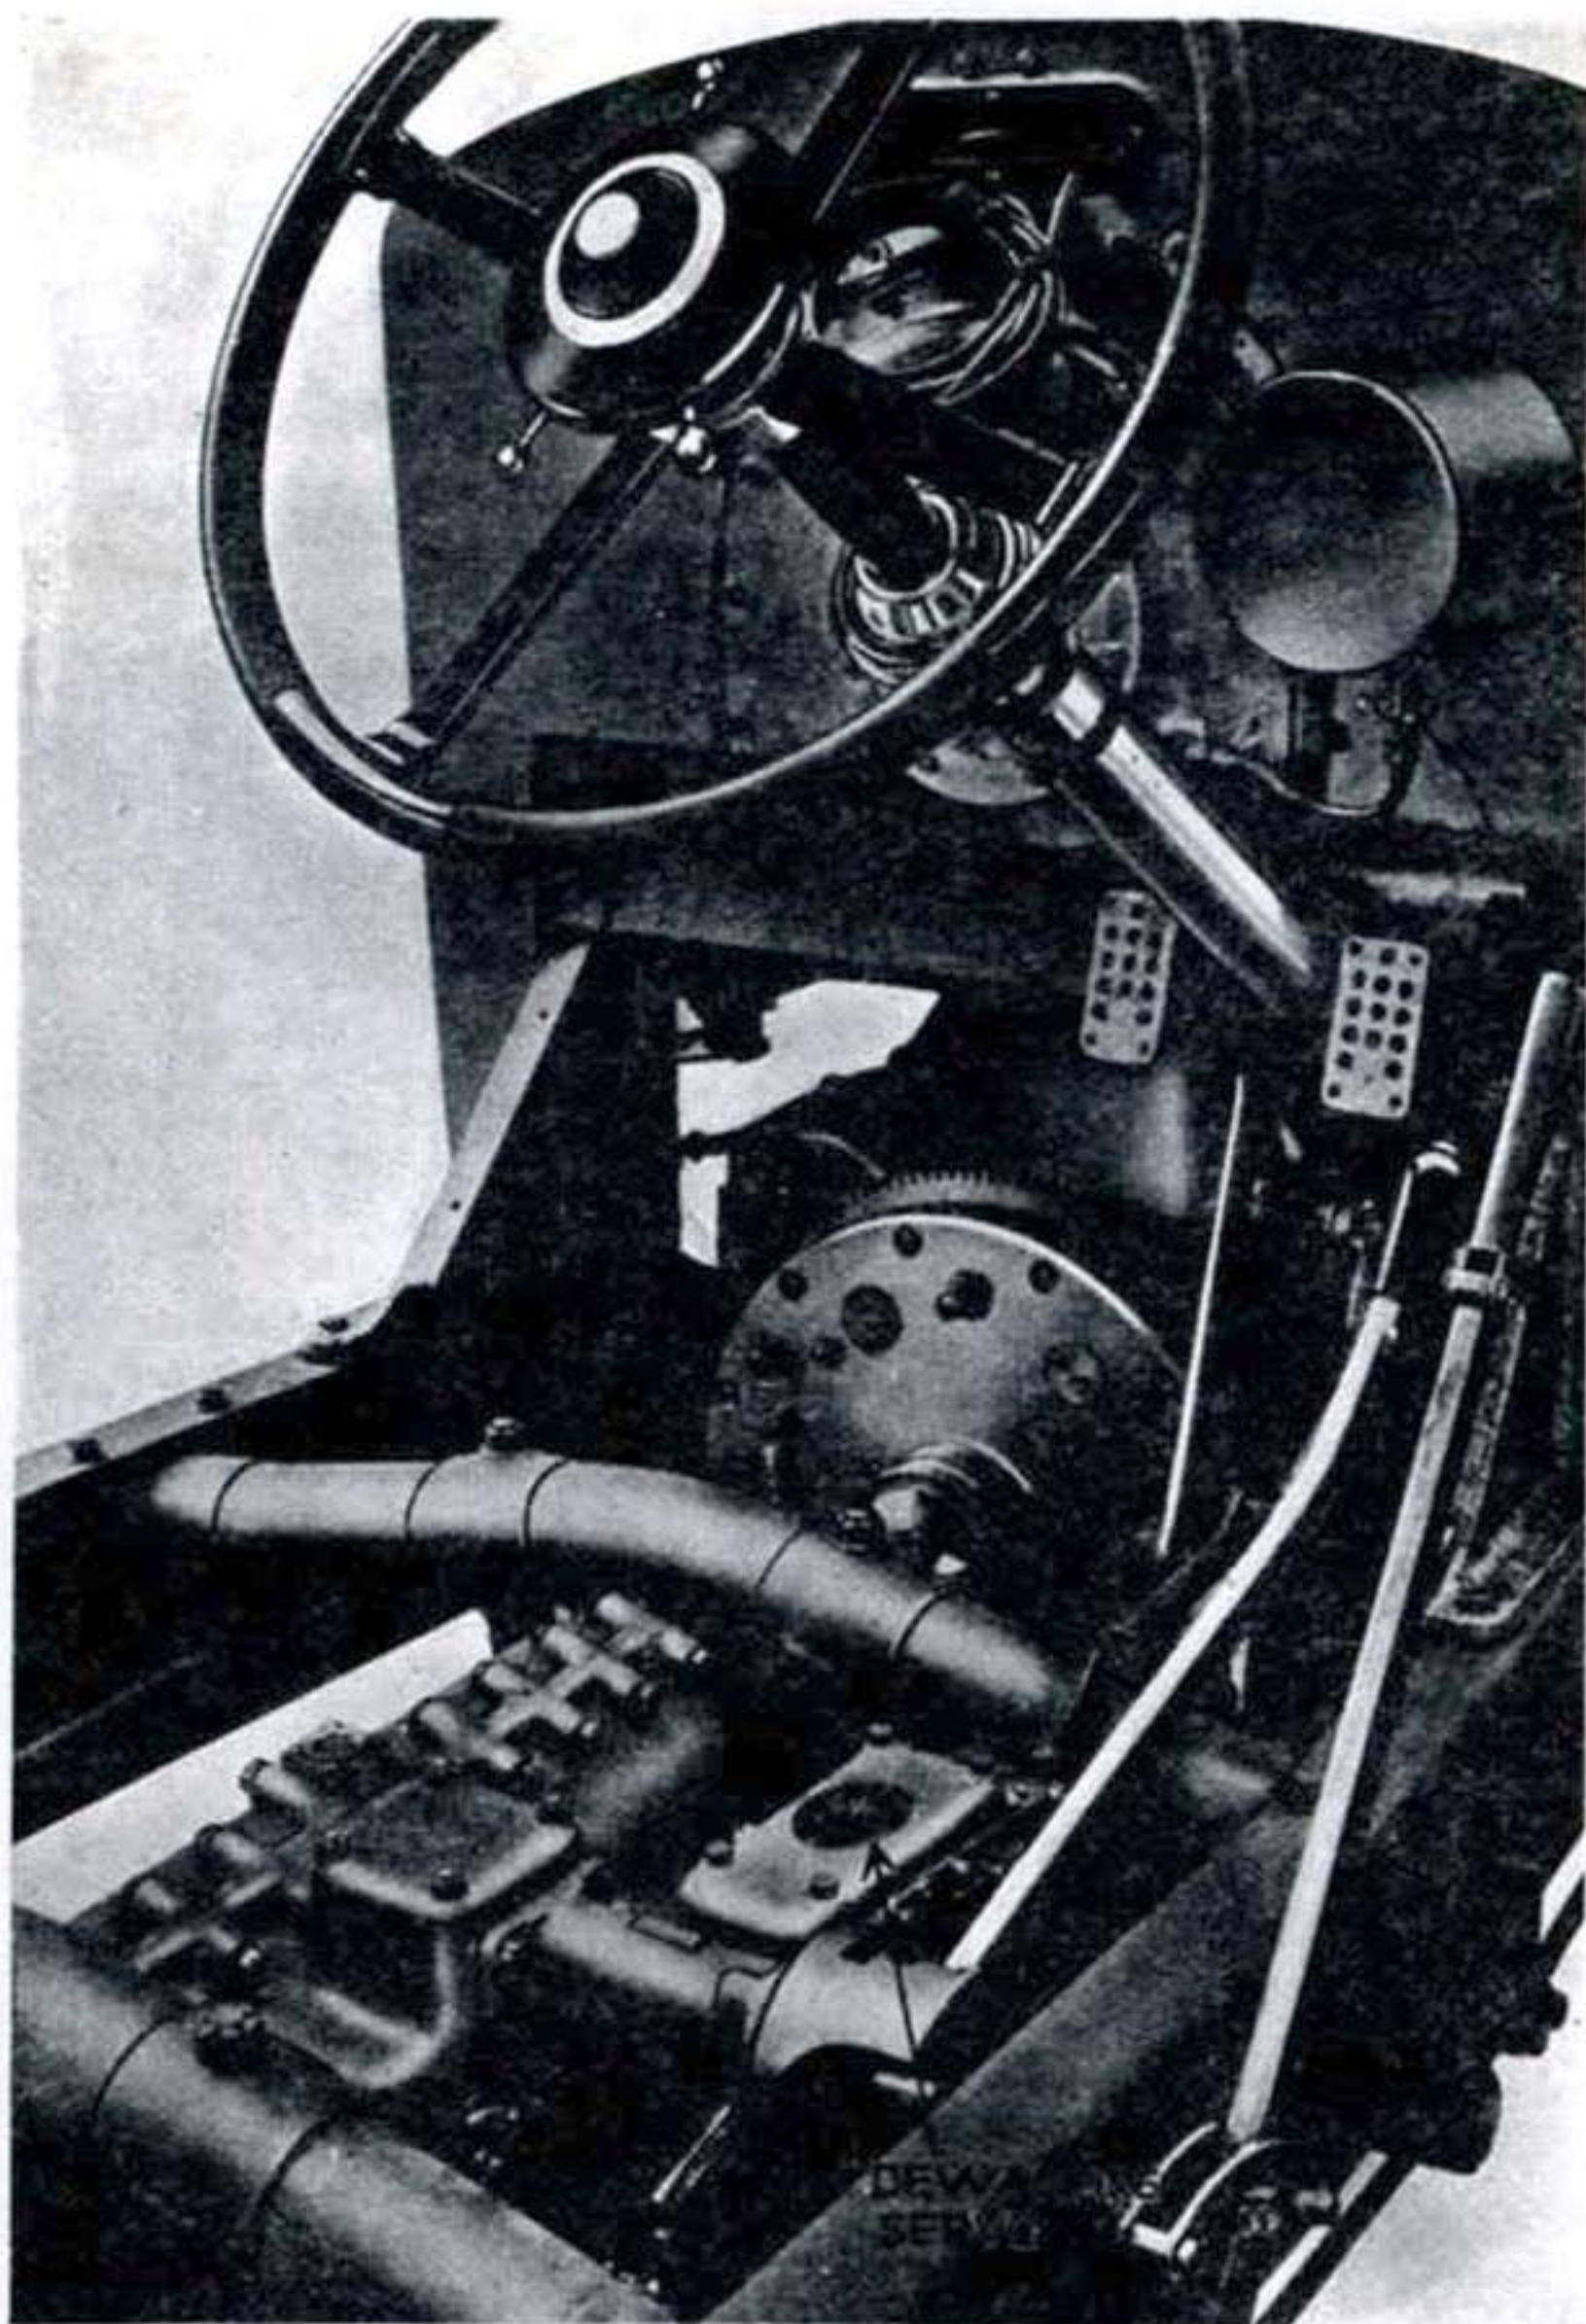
VIEW OF CLUTCH, GEARBOX AND DEWANDRE SERVO.
